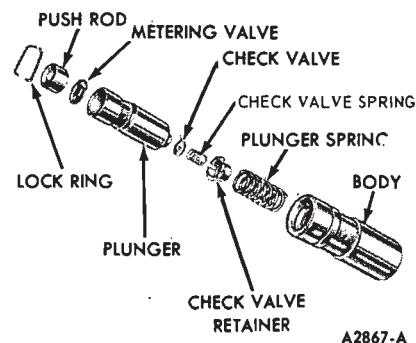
Type I Hydraulic Valve Lifter-Disassembled
